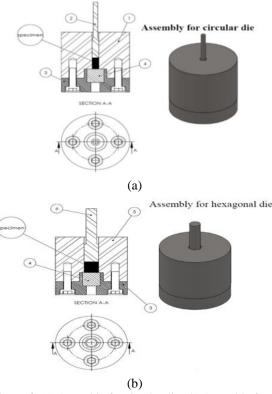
(a) Assembly for circular die, (b) Assembly for a hexagonal die
